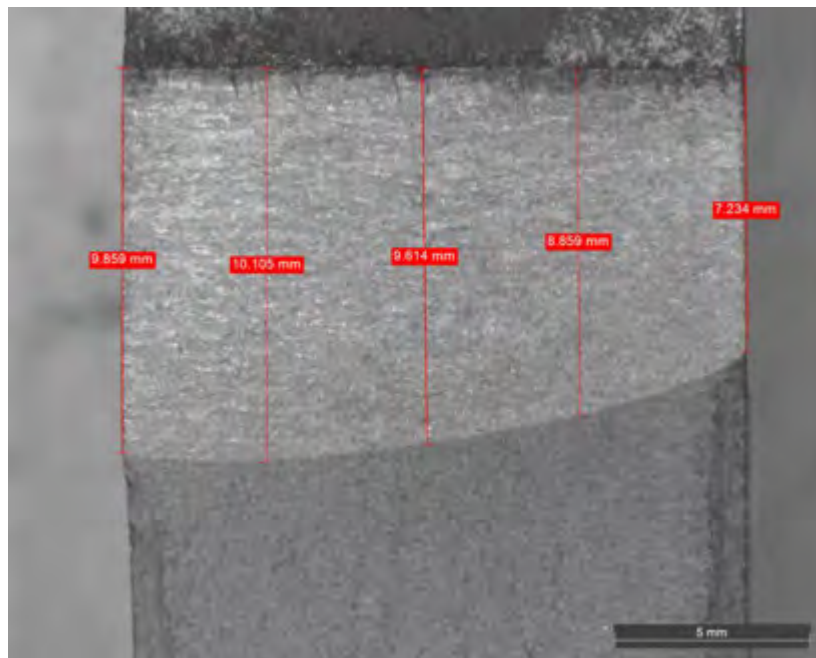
Crack length measurement of fracture surface of specimen FLAT – 3
